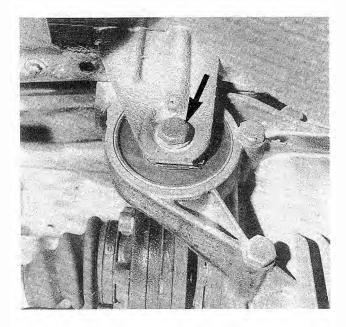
Mounting bolt (arrow) for final drive rubber mounting bushing. Remove nut from other side.
